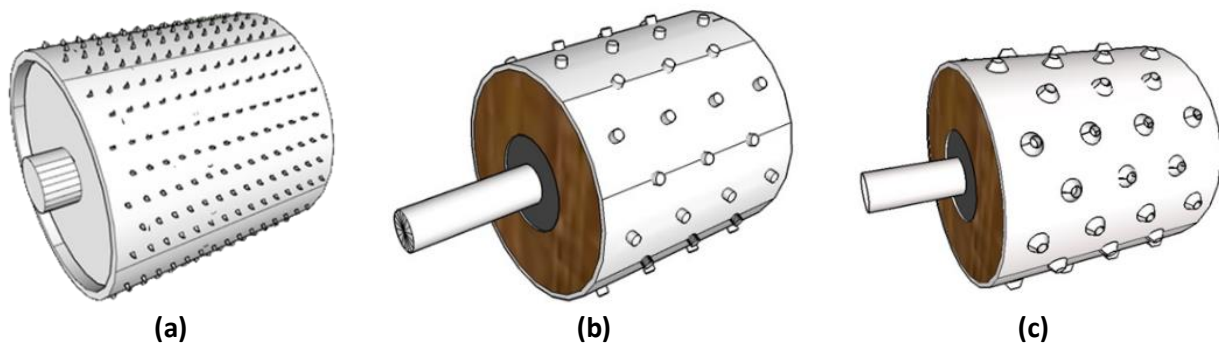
Teeth shape for shredder machine (a) K-type, (b) P-type, (c) B-type
